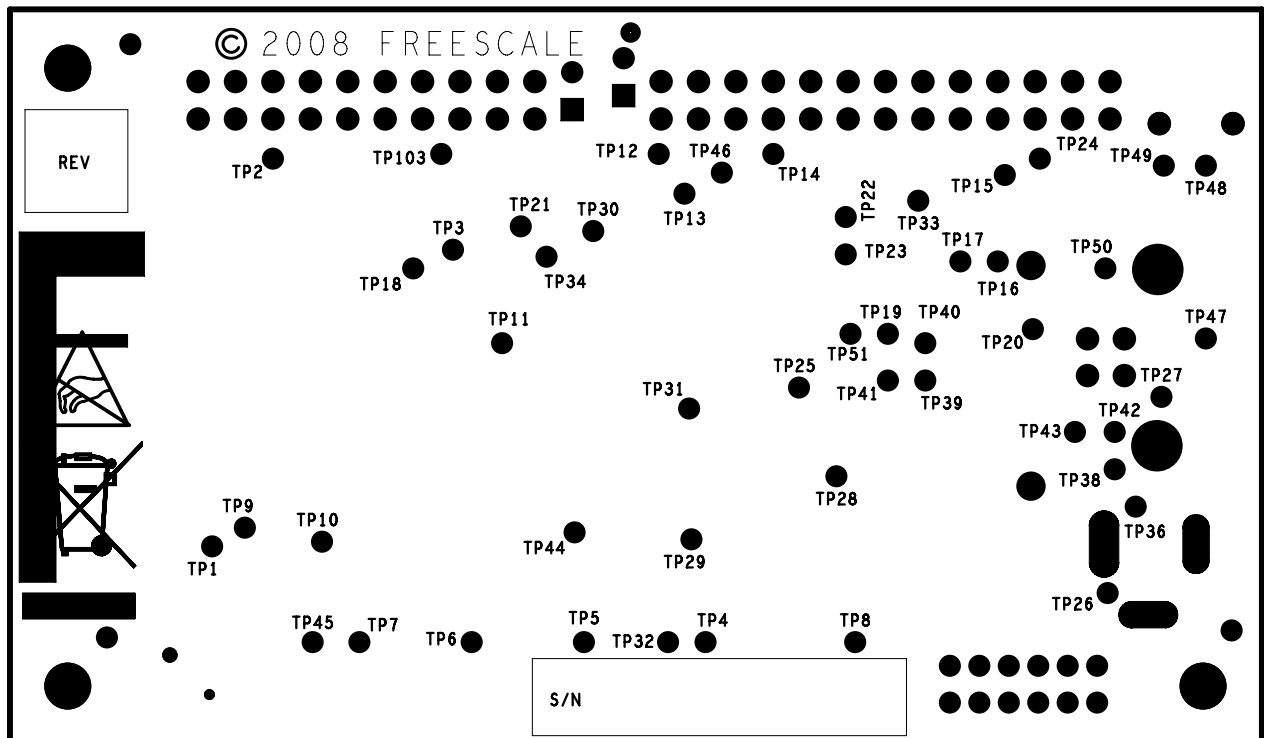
Sensor Node PCB Test Points (Bottom View)
